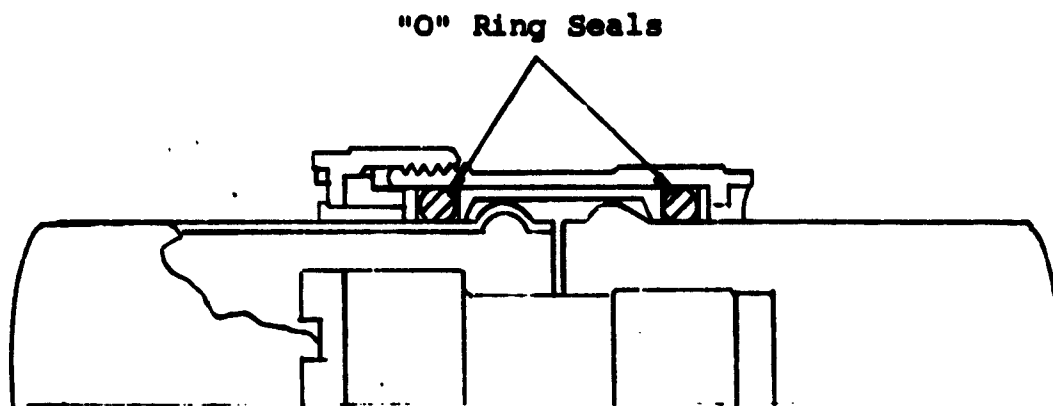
Glazing Assembly Seal Configuration (Ref.40)
